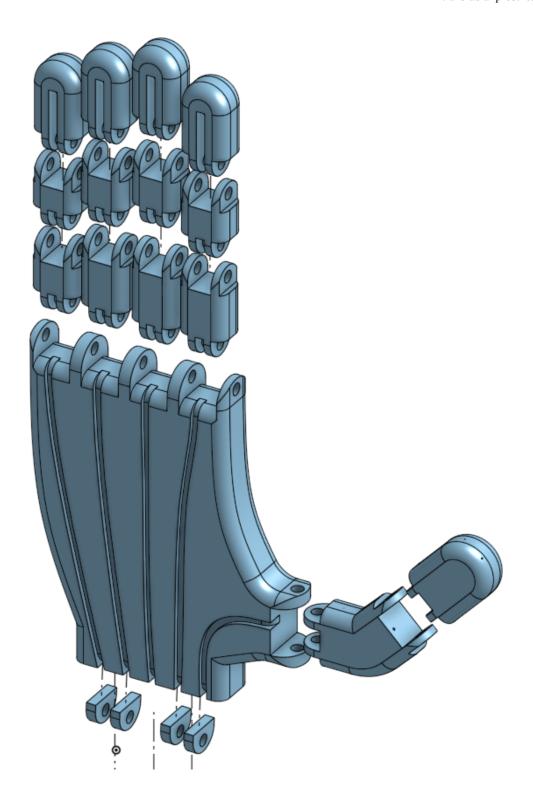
Exploded, dorsal view of transradial prosthesis prototype (hand)
